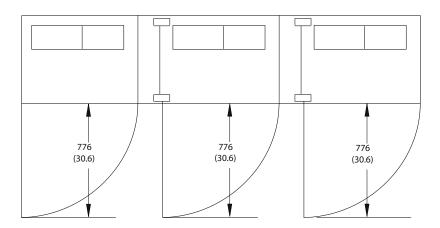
Front, Side, and Door Clearance Dimensions for F11
